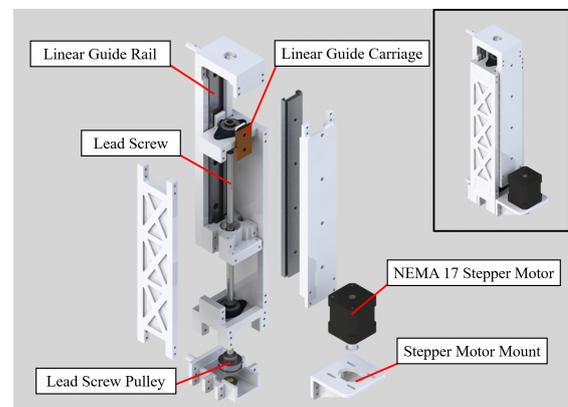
Custom linear-prismatic actuator construction and final assembly.
